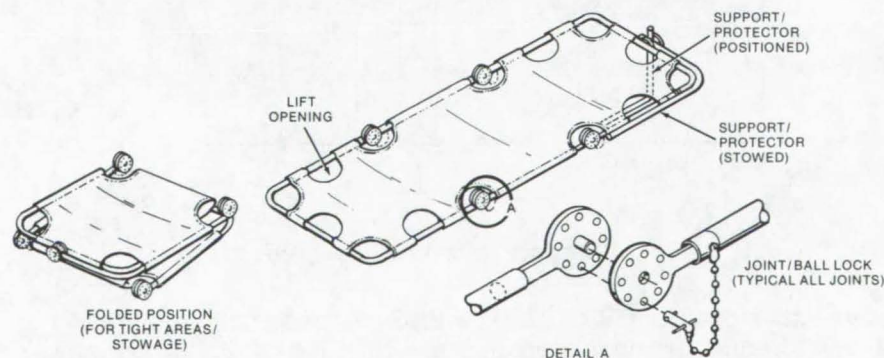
A Multiposition Locking Hinge can be locked in several positions, enabling the litter to be folded.
